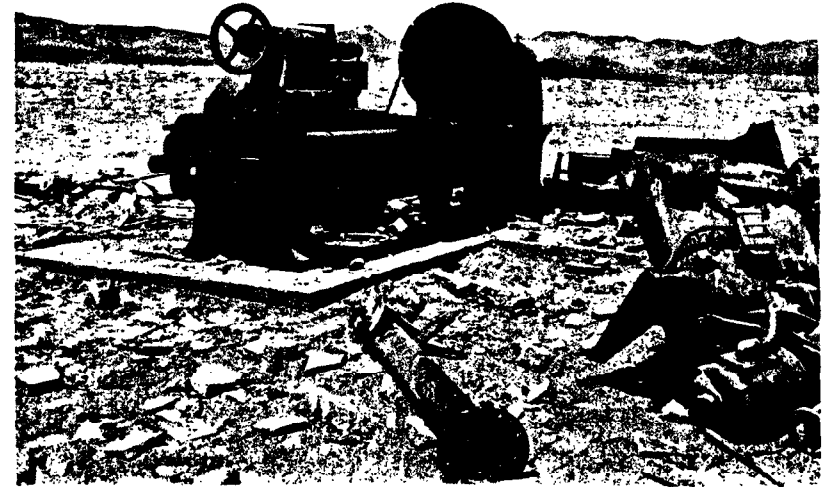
Heavy-duty lathe after the nuclear explosion (10 psi overpressure).
